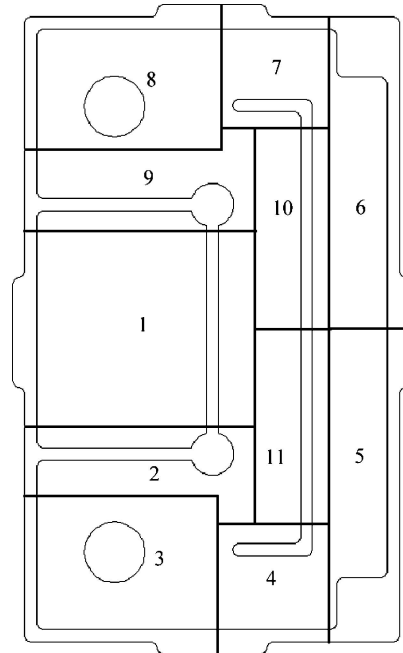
Sectioning procedure used to identify the fold defects in the casting. Initially, the casting was sectioned with a saw as shown above. Each sectioned piece was then placed in a vice grip and hammered at various locations to fracture the specimen. The fractured surface was examined to identify the location, size and number of fold defects in the casting. Each casting was fractured into more than 40 pieces by this procedure.
